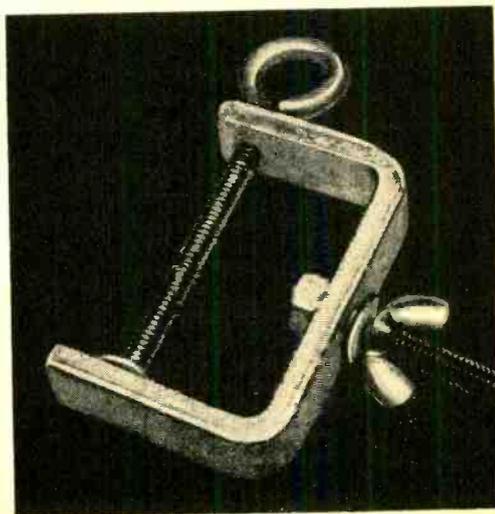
A winged nut on the threaded shaft permits rotation of the clamp holding arm.
